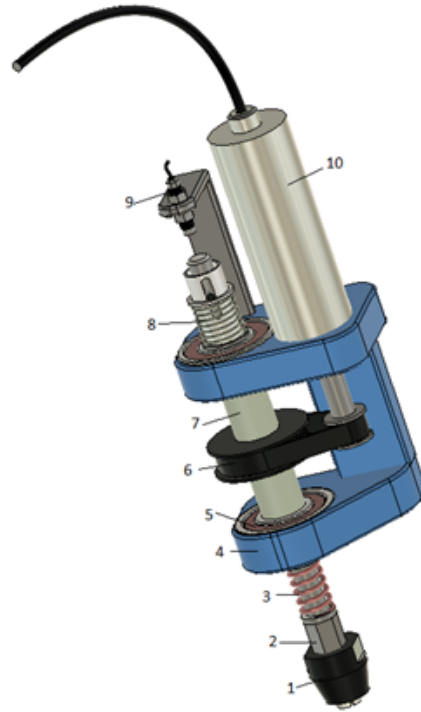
Custom tool for dismantling capacitors: 1-Chuck; 2-Sliding axle with chuck; 3-Fastening spring; 4-Device support; 5- Bearings; 6- Toothed wheel assembly connected with strap; 7- The axis of rotation; 8- Spring to hold the spindle in the work area; 9- Capacitive proximity sensor with possibility of adjustment in the working area; 10-Programmable screwdriver
